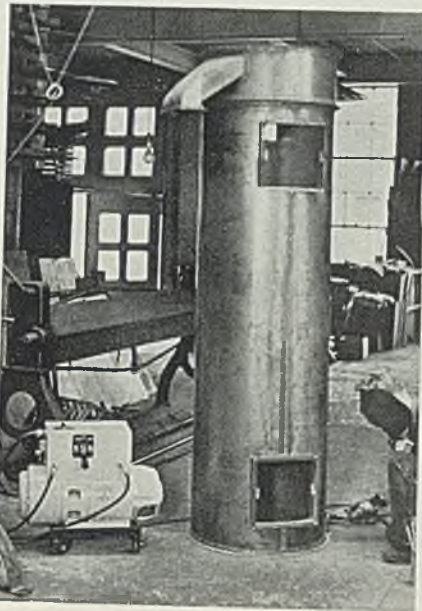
Dust collector tower and midget welding unit, a Wilson Wasp, used in its fabrication
